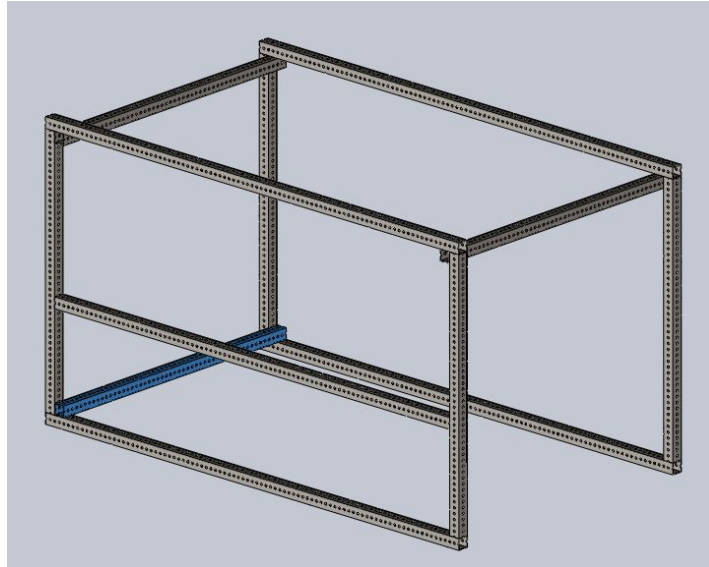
Assembly of Final Beam B Post to Frame
